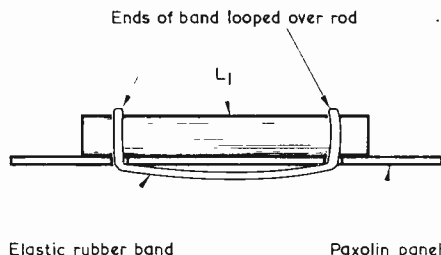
The method employed for fixing the ferrite rod. The battery is secured in place in a similar manner
